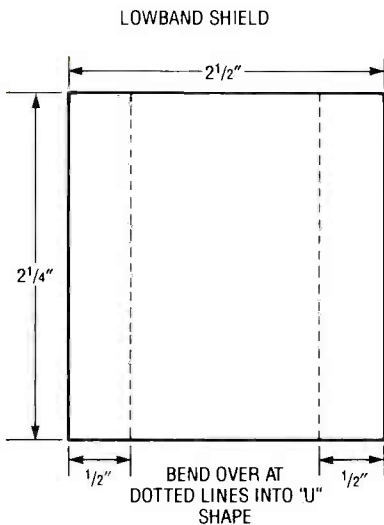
THE LOWBAND SHIELD is soldered on the top side of the PC board.
